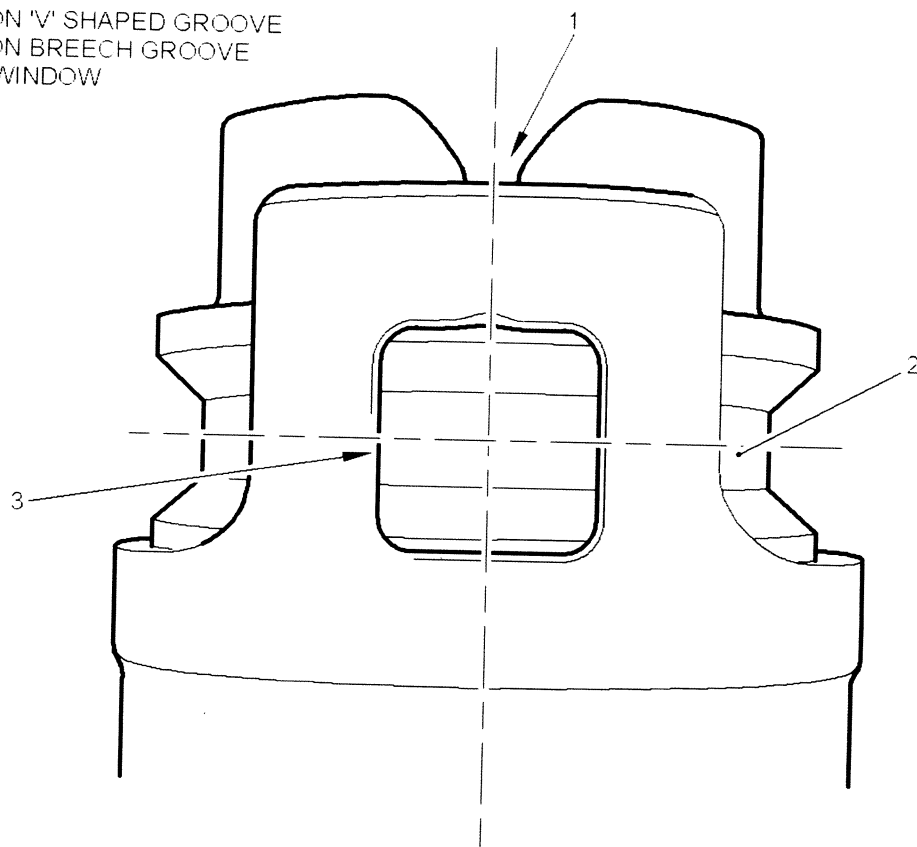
Correct alignment of inner piston V shaped grooves, inner piston breech groove and outer cylinder top latch window
